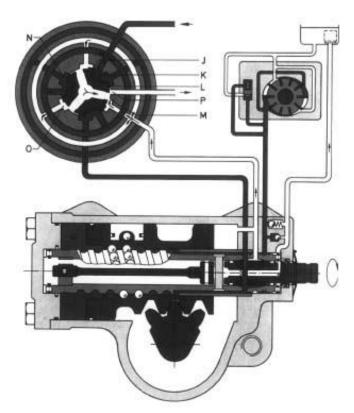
Working principle diagram of ZF8095 and ZF8098 steering gear (In case of right turn) J-Oil inlet and Oil return closed K-Connected oil inlet L-Oil inlet and Oil return closed M-Connected oil return N-Connected oil inlet O-Connected oil return P-Oil return port
